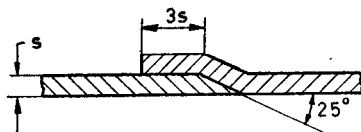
LAP WELD, LOWERMOST PART CHAMFERED
